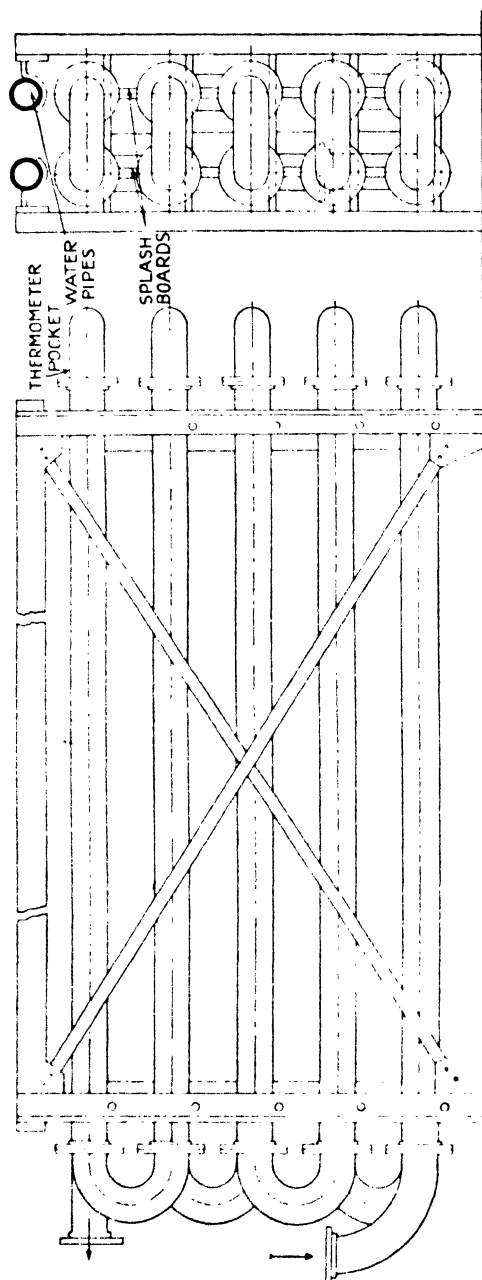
Acid Cooler—5-in. Steel Pipe.
